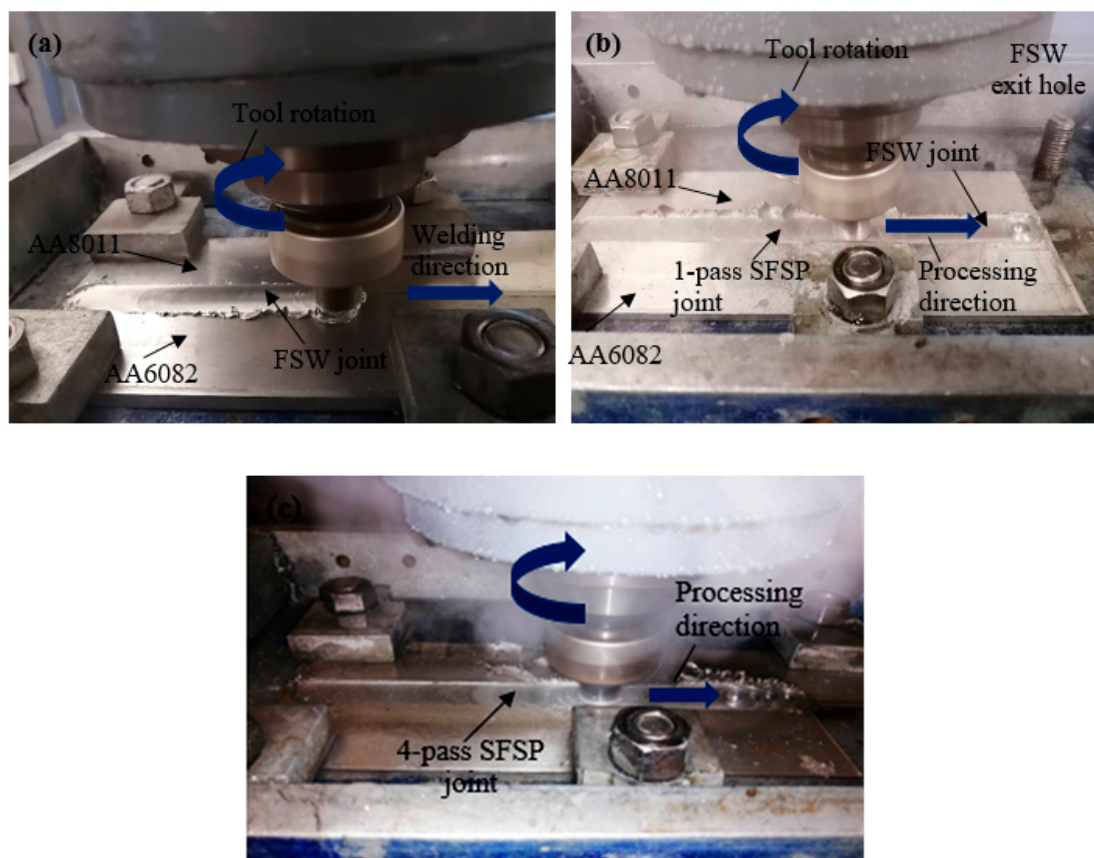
(a) Friction stir welding process, (b) one-pass submerged friction stir processing (SFSP) and (c) four-pass SFSP.
